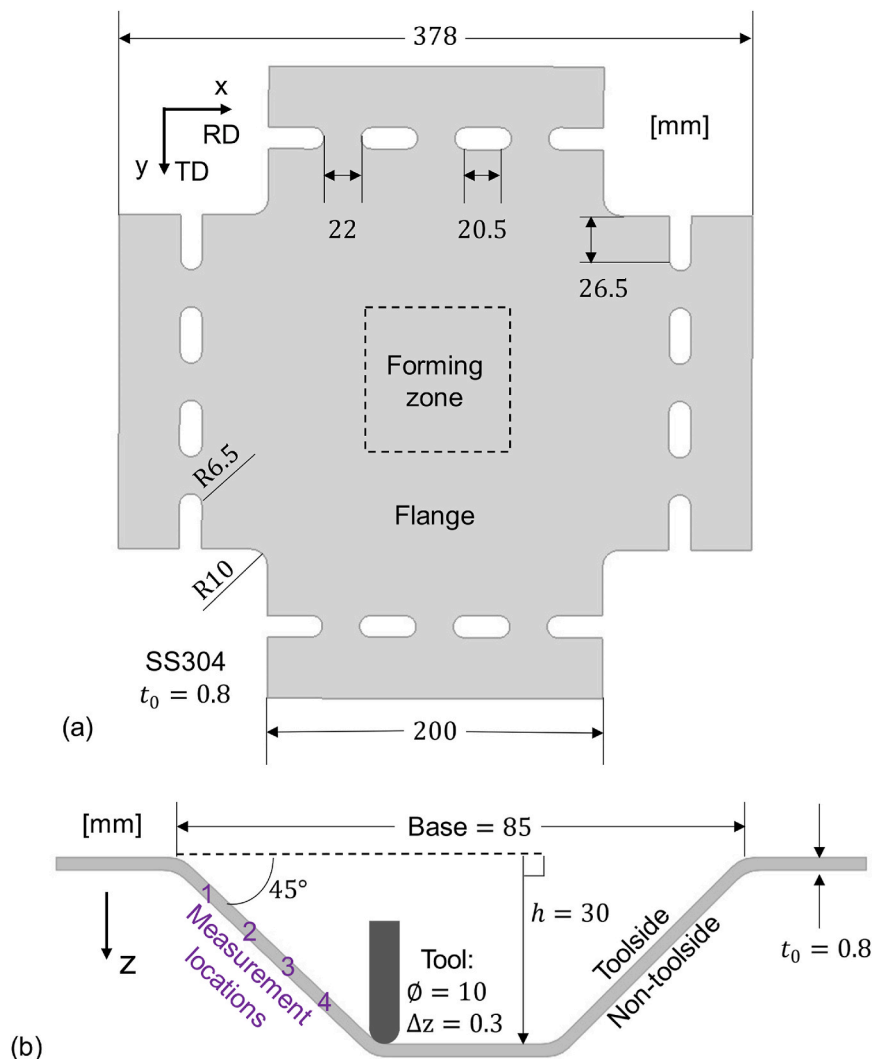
Incremental forming (a) blank, (b) target, and forming tool geometries.
